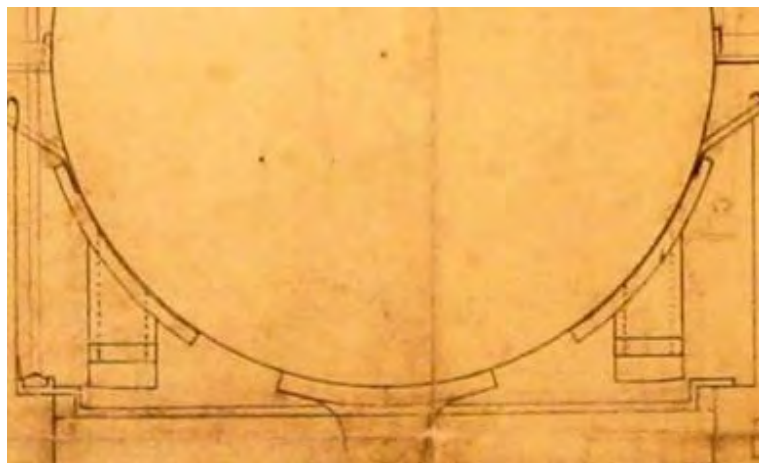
Cylindrical boiler supports on early schematic drawing. [Fig. 1.2 – detail]
